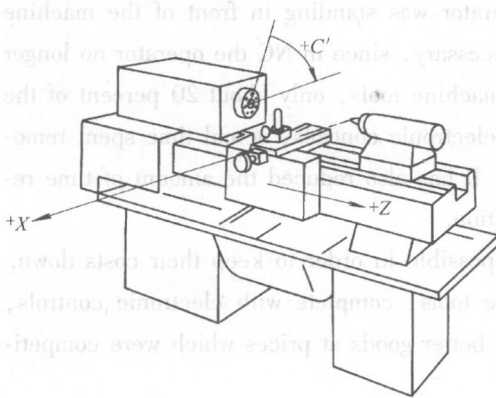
The engine lathe cutting tool moves only on the X and Z axes
